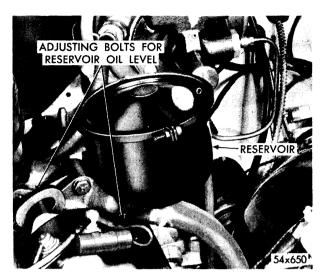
Adjusting Oil Pump to Level Oil in Reservoir
